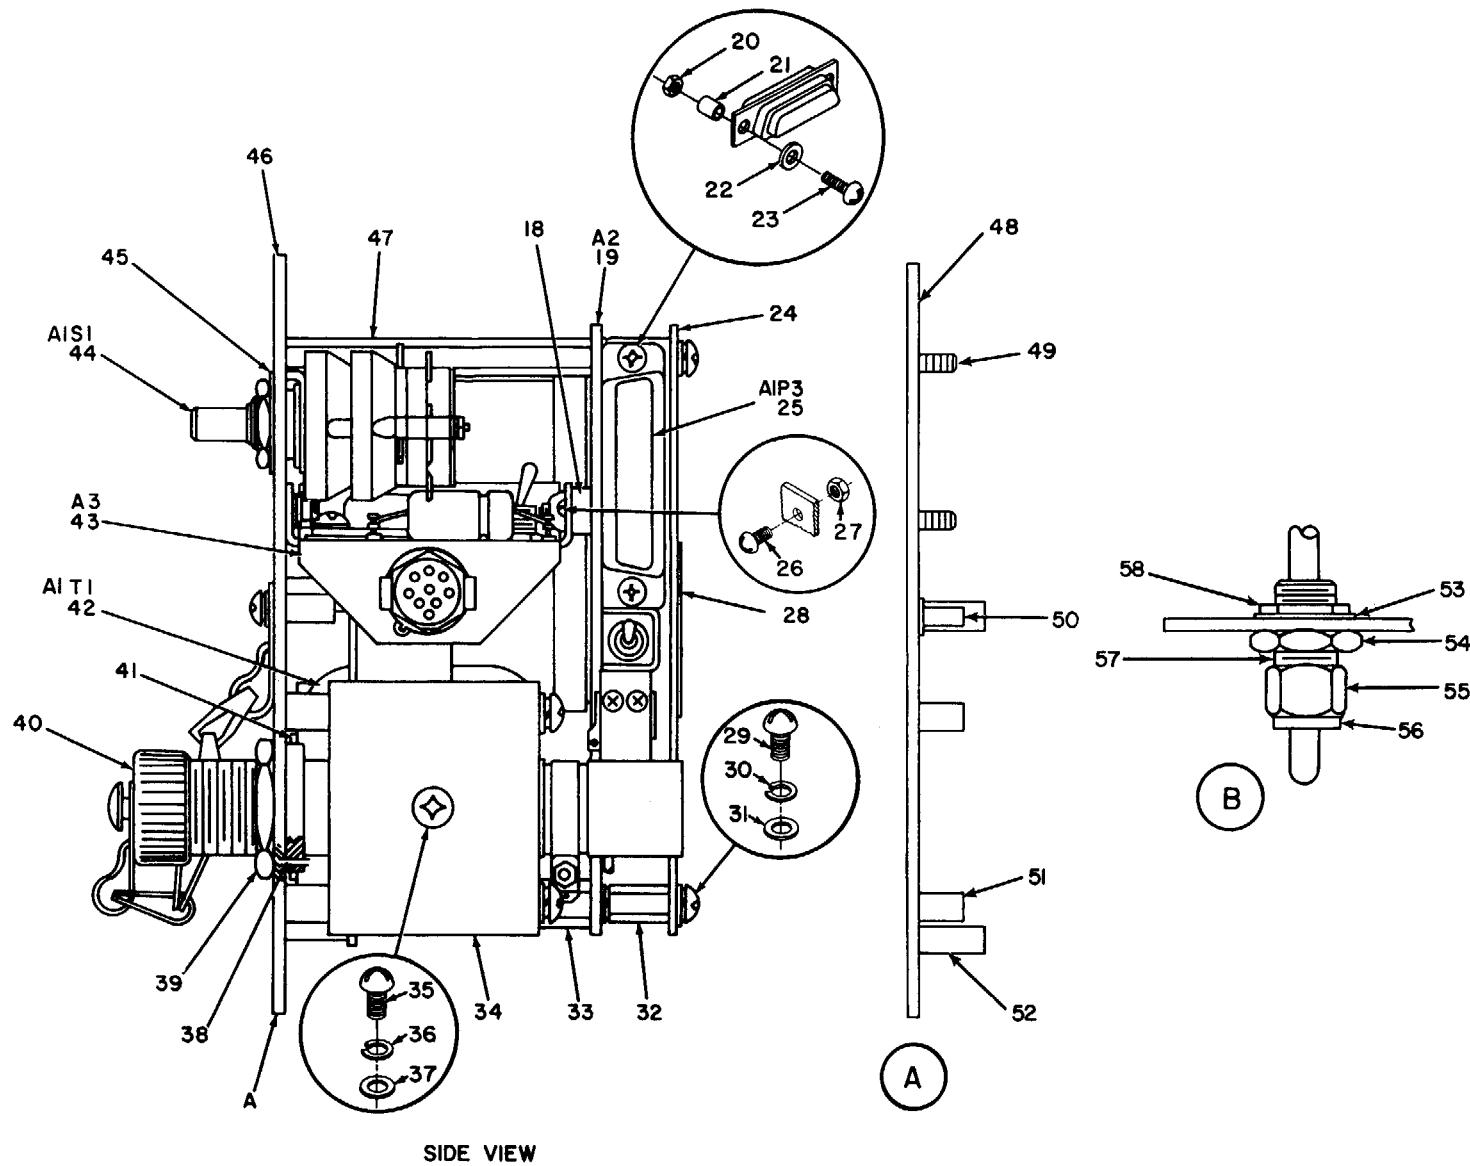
Front Panel Assembly (Sheet 1 of 2).
